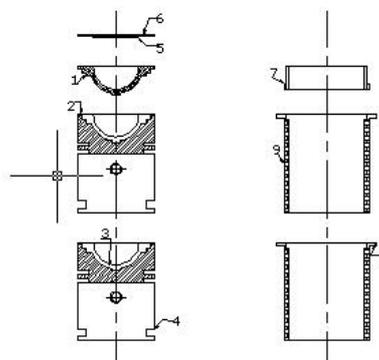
Schematic diagram of assembly the insulated piston, insulated liner and ceramic coated cylinder head of the engine with LHR–3 combustion chamber .
